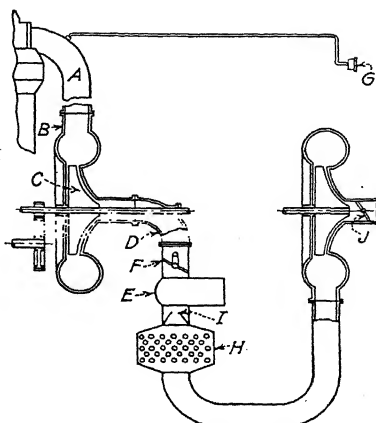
Two-stage geared centrifugal supercharger. A, intake pipe; B, super collector ring; C, impeller; D, air intake; E, carburetor; F, throttle valve; G, super air-pressure gage; H, intercooler; I, automatic suction valve; J, air inlet. (From *S. A. E. Jour.*, Vol. 43, No. 5, November, 1938.)
